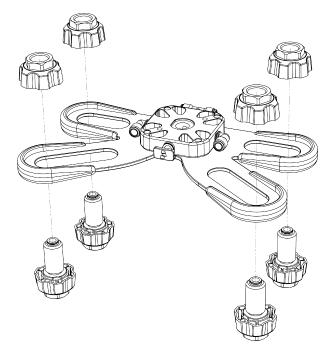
Mounting air nodes (suction cups, air bolts, air nuts) on the bracket
